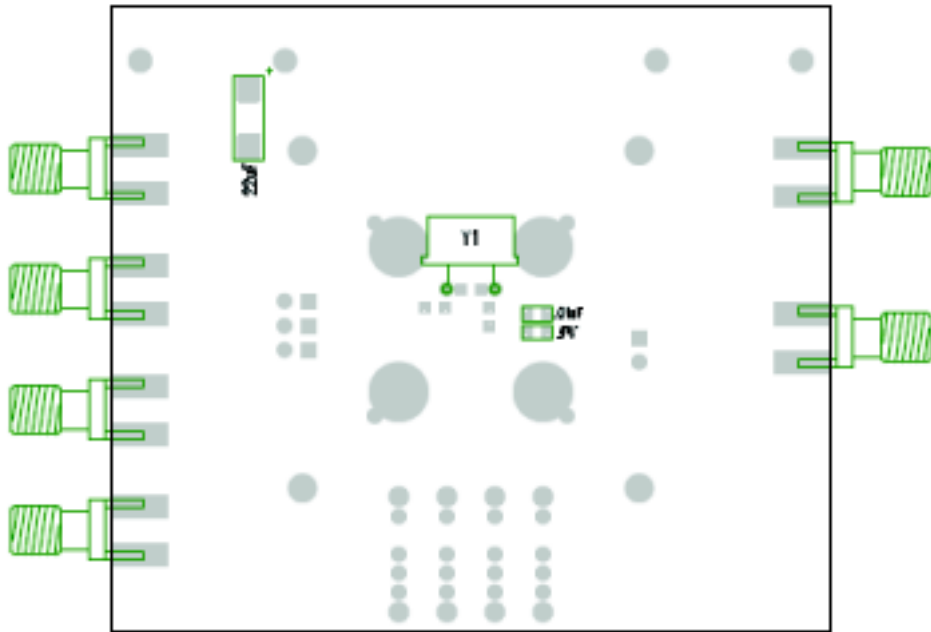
NB3N502 Evaluation Board Bottom Assembly
